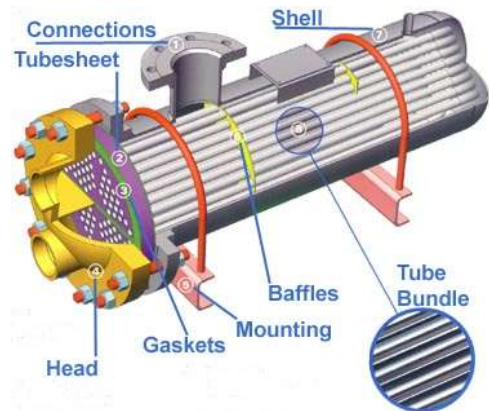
Cross sectional view of Shell & tube heat exchanger[4].
